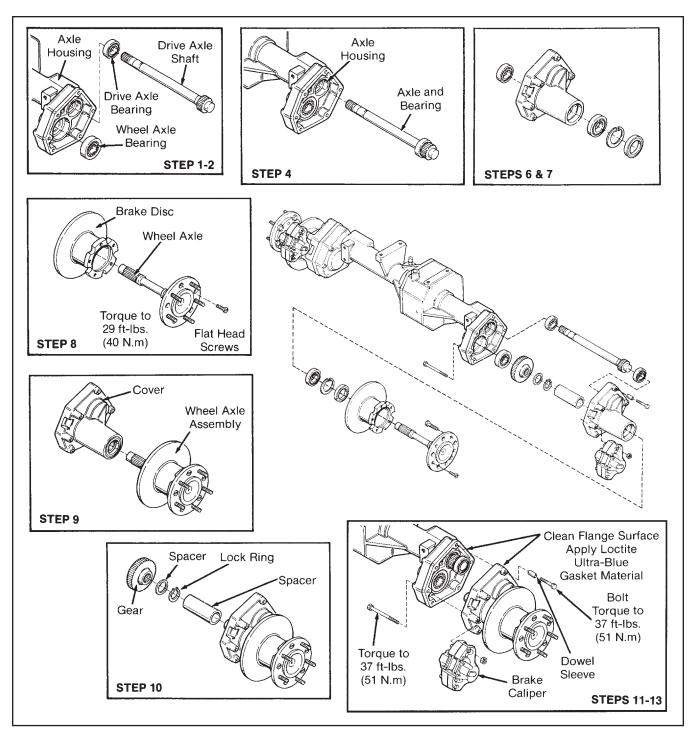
E-7. Reduction Gear and Drive Axle Reassembly
